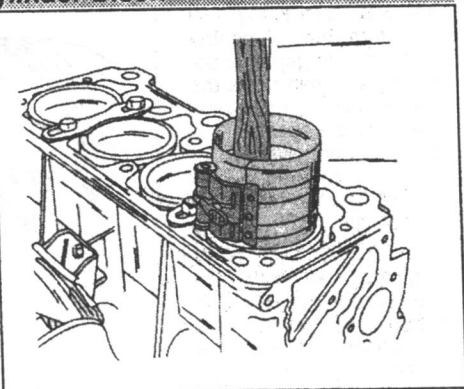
Fitting a piston with a piston ring clamp.
